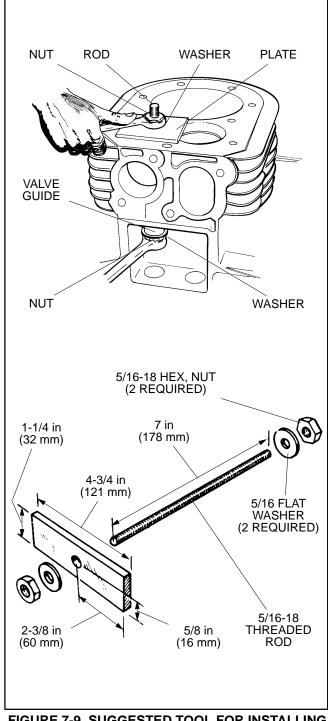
SUGGESTED TOOL FOR INSTALLING THE VALVE GUIDES
